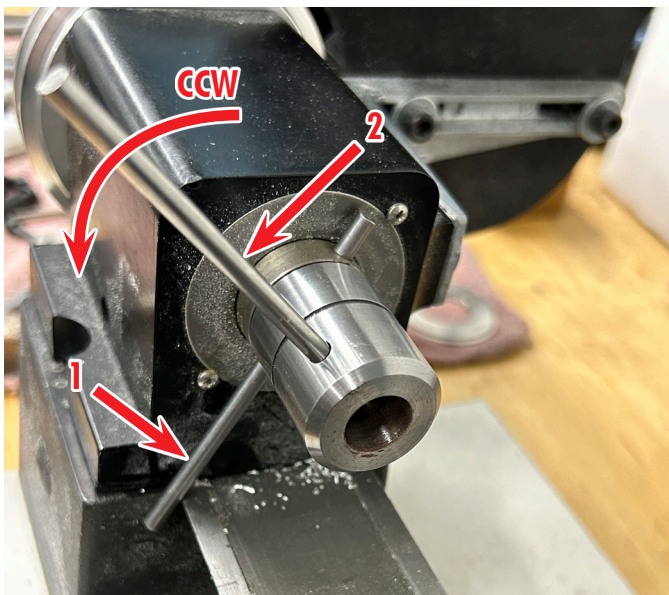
#1 shows the Tommy bar inserted through the headstock spindle. #2 shows the Tommy bar inserted in the access hole of the holding device.
